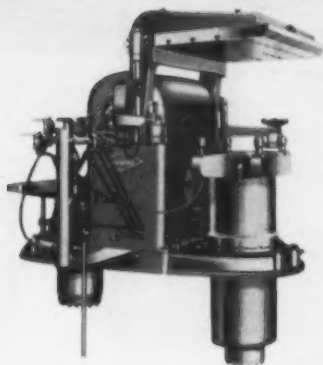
Large, stationary machine for jolt rockover work shown with table inverted for mold drawing.
